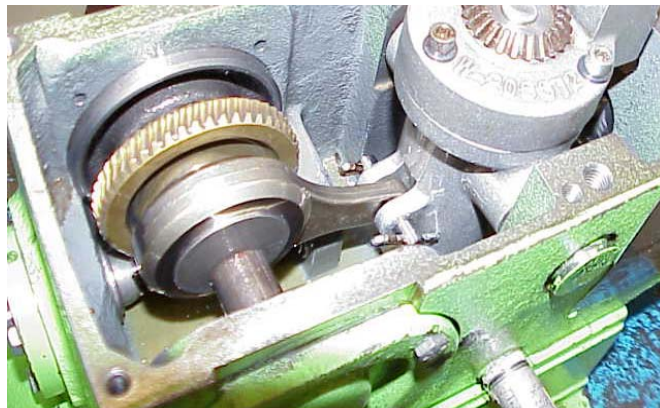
View of Eccentric and Speed Reducer Gear / Worm Gear
